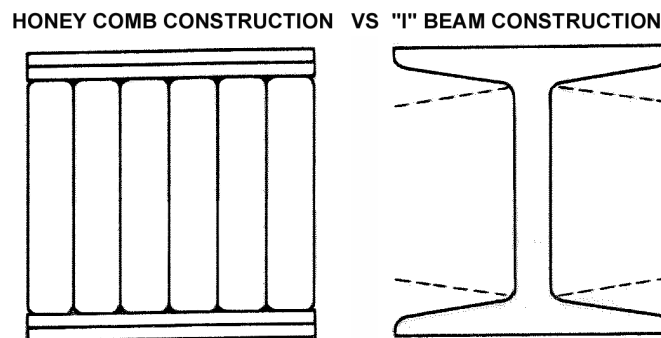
, this concept can also be shown using a spar I-beam example. The flanges of the I-beam will bend and flex; however, with a solid core material, the tendency to bend is eliminated.
